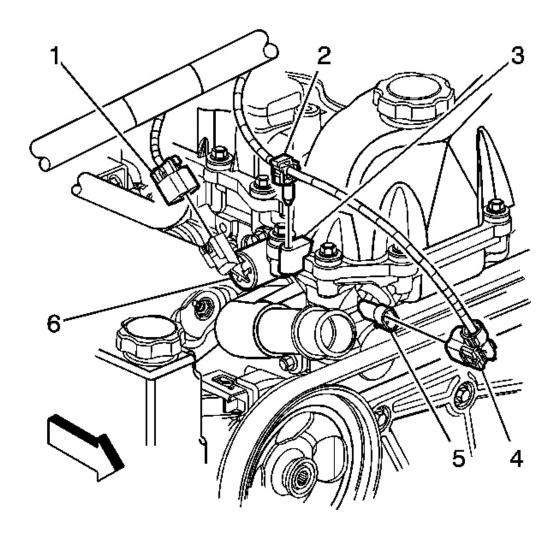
View Of CMP Sensor Connector, Exhaust Camshaft Actuator Connector & Engine Wiring Harness Retainer Courtesy of GENERAL MOTORS CORP.
